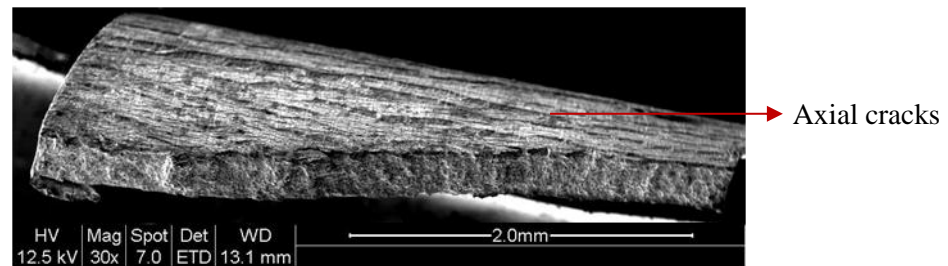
Axial cracks on the outer surface of the cladding piece removed from ballooned region of the failed fuel pin.
